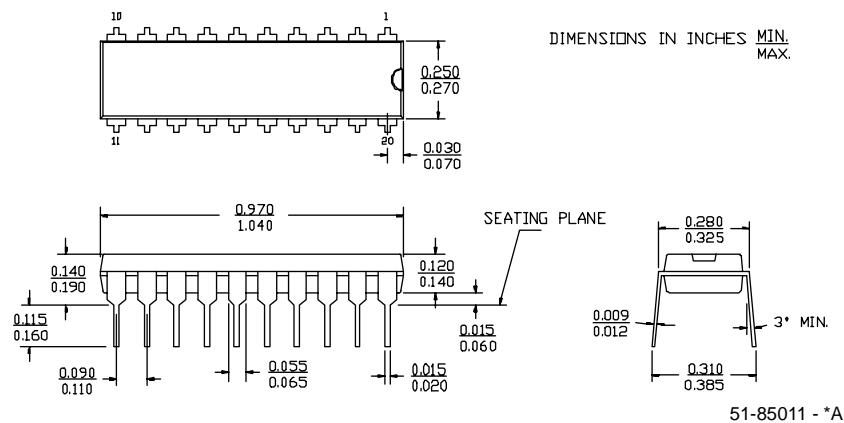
20-Lead (300-Mil) Molded DIP
